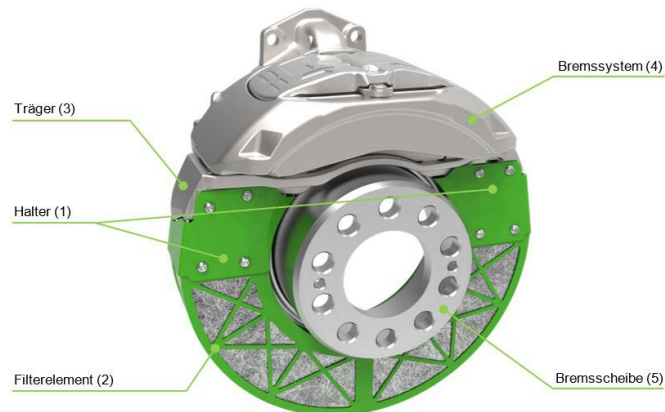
Design concept with holder (1), filter element (2), carrier (3), brake system (4), and brake disk (5).
